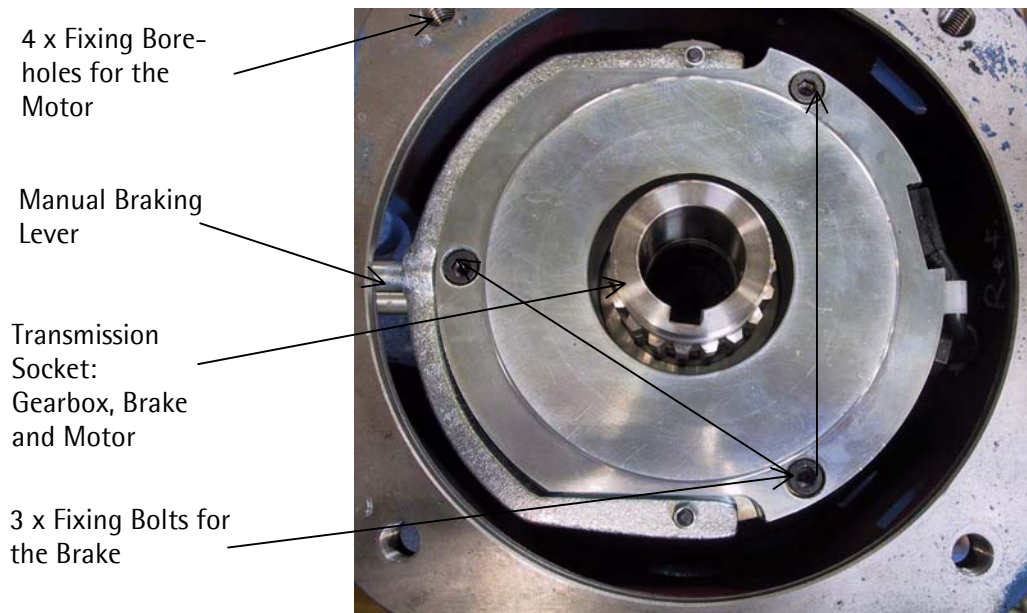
Looking at the Flange casing and Brake, the Motor has been removed
